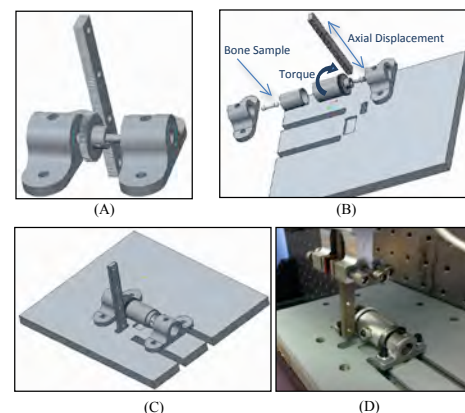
Apparatus design and components. (A) Initial rack and pinion gear concept. (B) Exploded view of components. (C) Final CAD assembly. (D) Final assembly on testing platform.
